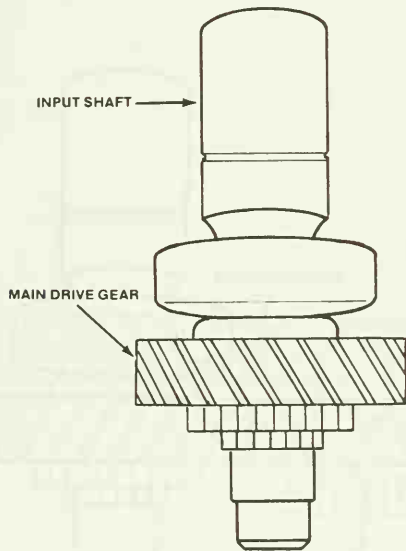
The main drive gear is driven by the transfer case input shaft.
